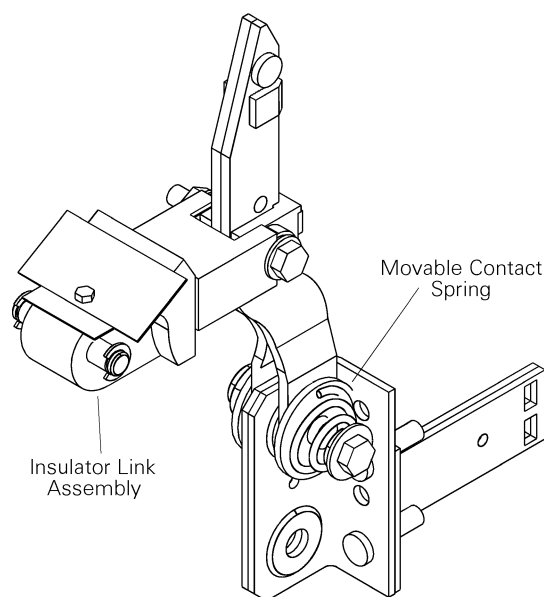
Lower Contact assembly for WPS08 and WPF08.
